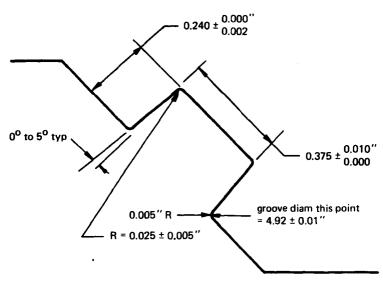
Groove configuration for 0-rings, lobed rings and lip seals in rectangular groove-angular flange seal systems.
